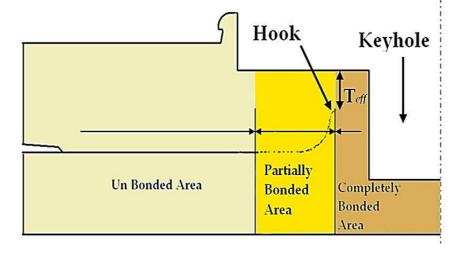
A cross-sectioned FSSW joint illustrating the structural defects included within the joint.
